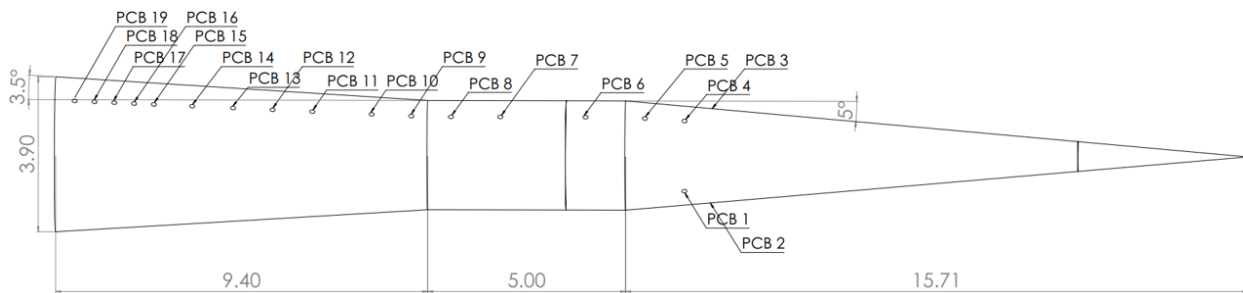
Cone-cylinder-flare with 3.5° flare. Dimensions in inches.
